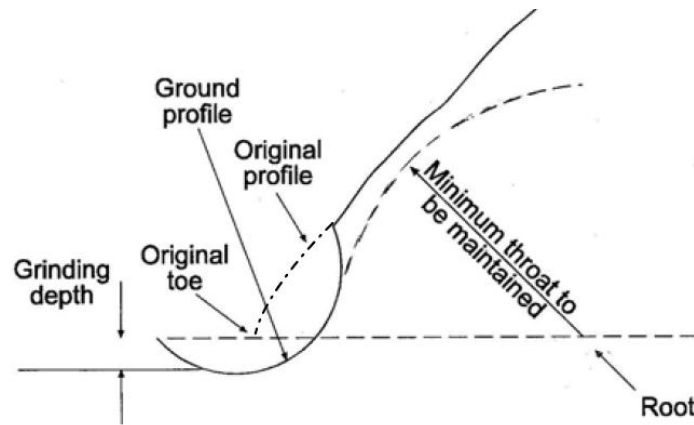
Weld toe geometry after grinding (Haagensen & Maddox, 2001)
